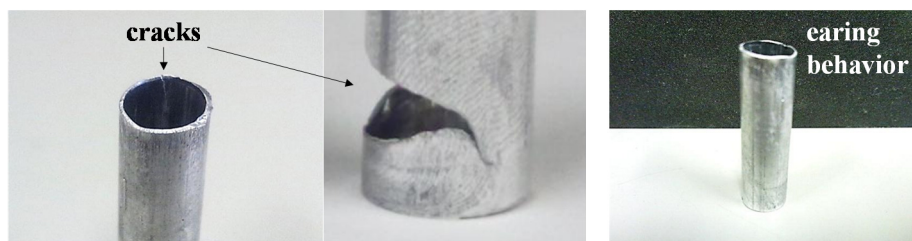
Defects in impact backward extrusion using AC4CH-F.
